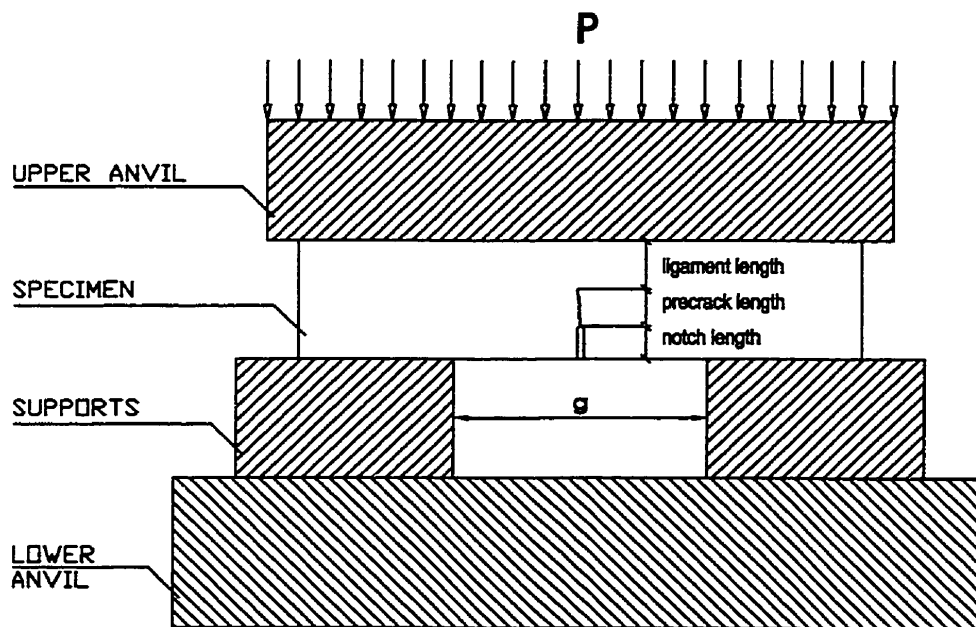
Jig used for precracking notched specimens [116].
